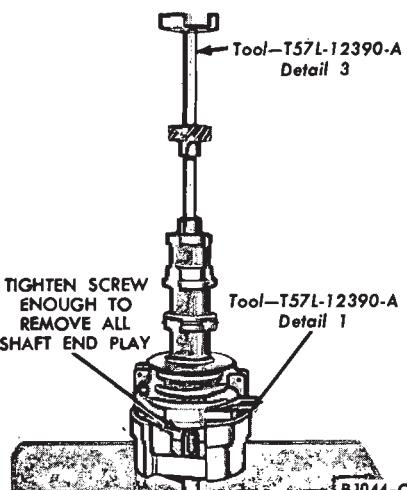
Installing Original Shaft and Gear—V-8 Engine
